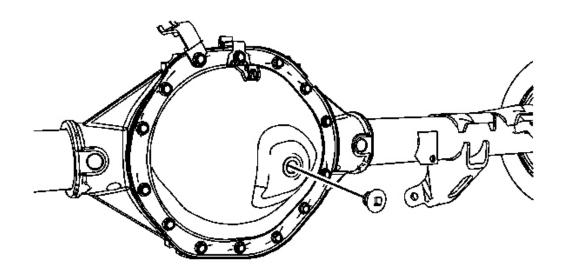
View Of Rear Axle Fill Plug Courtesy of GENERAL MOTORS CORP.
